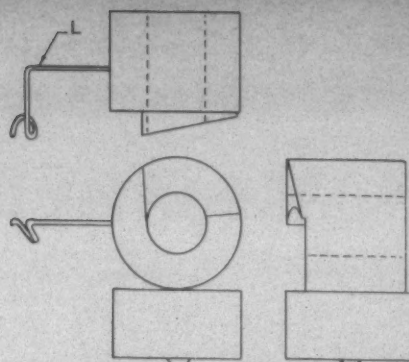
A three view drawing showing the coil compressor and yarn guide for the instrument.
